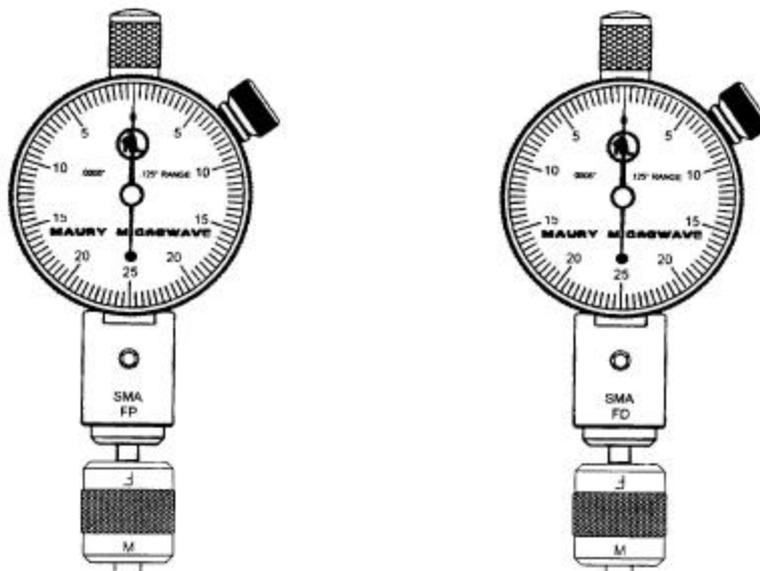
Type SMA push - on type dial gauge for female pin depth (FP) & dielectric FD with calibration block
